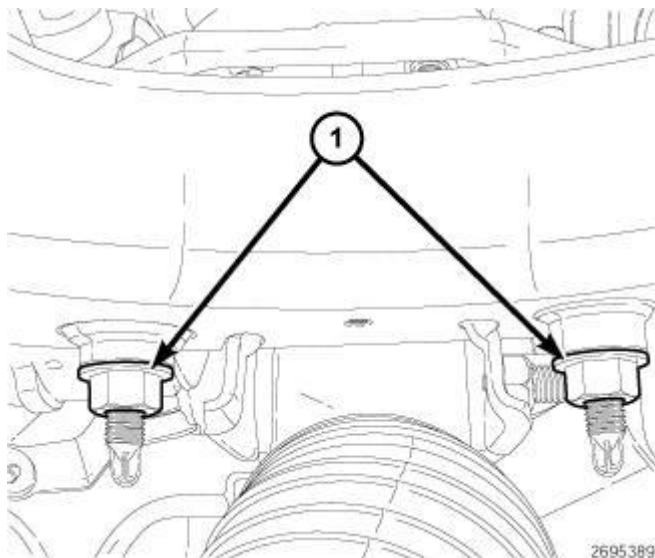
LEFT LOWER ENGINE MOUNT RETAINING NUTS
